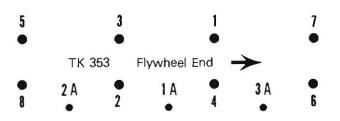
TK353 Cylinder Head Torque Sequence: 1-1A-2-2A-3-3A-4-5-6-7-8
